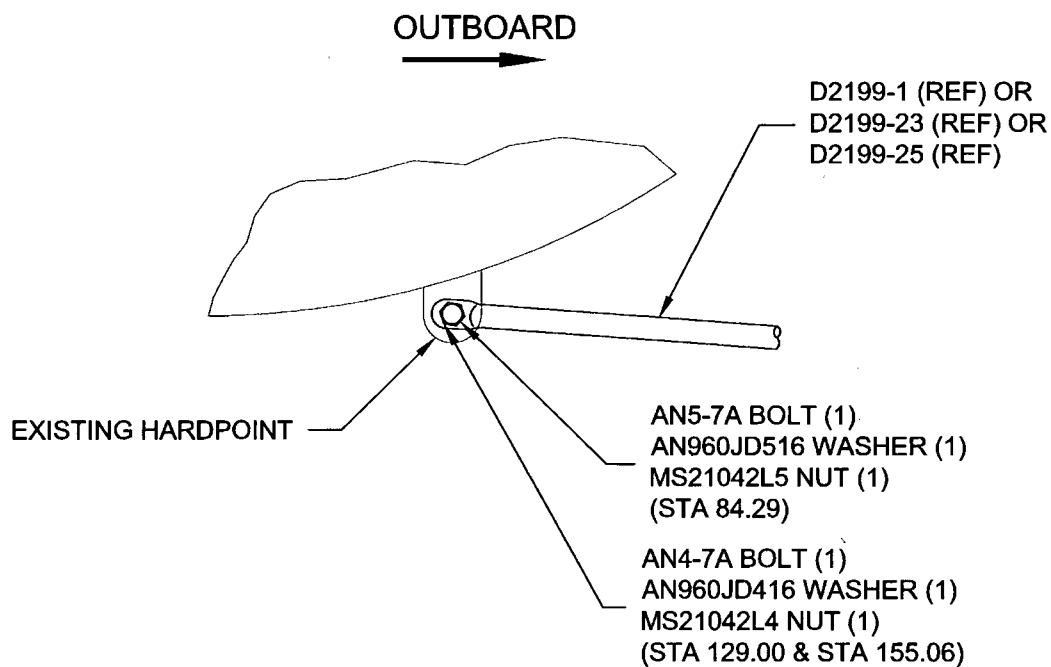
Section C-C Looking Fwd at STA 155.06
